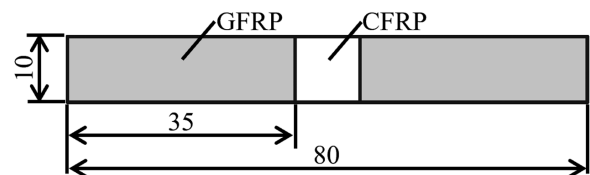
CFRP specimen geometry for hydraulic fatigue test (unit: mm).
